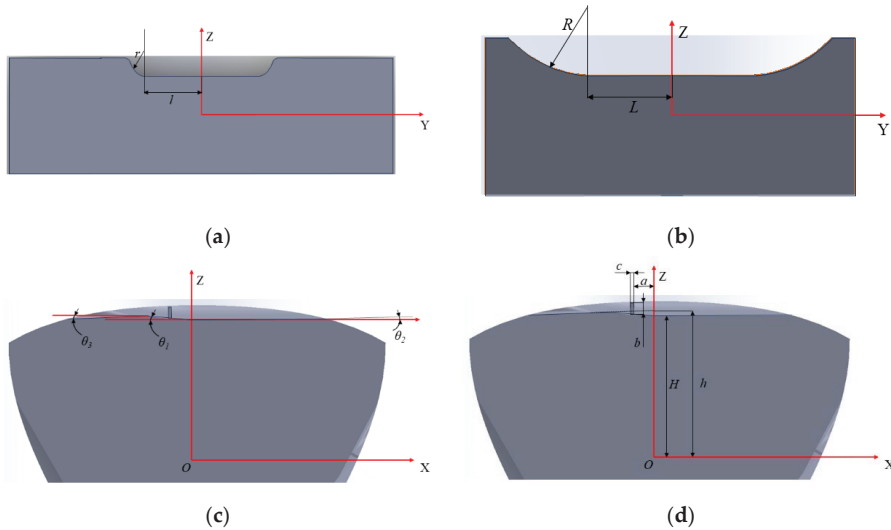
Combustion chamber dimensions. (a) A-A section size. (b) B-B section size. (c) C-C section angle. (d) C-C section size.
